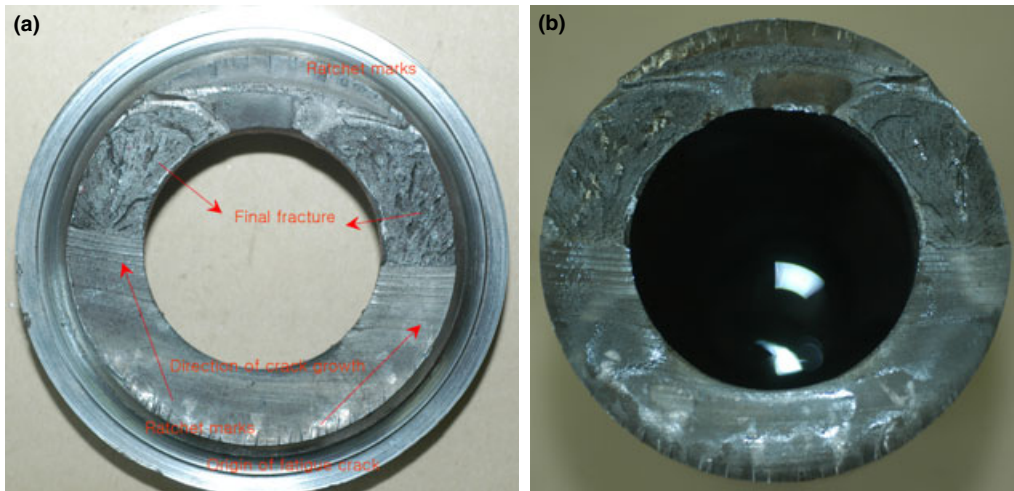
(a) The fractured surface of the axle (trailer part). (b) The fractured surface of the axle (wheel part). The beach marks are clearly visible both at the lower and upper parts.
